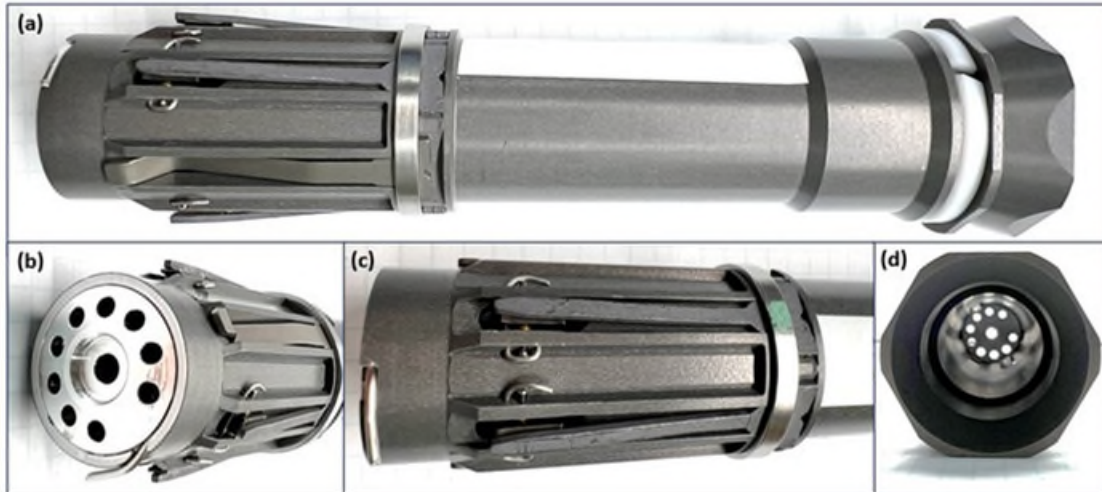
Prototype sleeve mechanism photos. (b) Detail view of sleeve endcap. (c) Detail view of pawl springs and shrink ring. (d) View looking down entry cone where RGA is installed.
